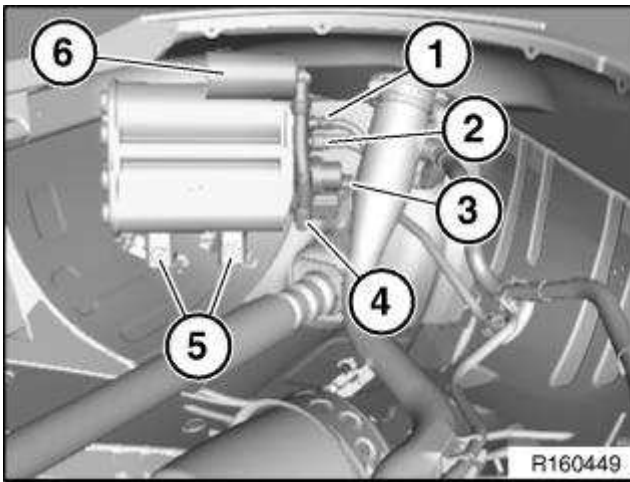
Removing/Installing Carbon Canister With DM-TL
